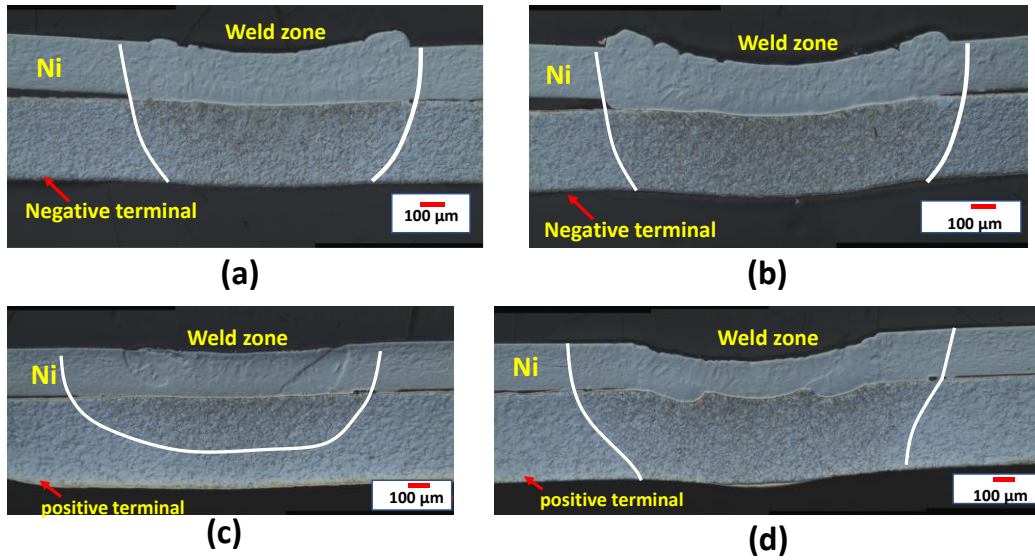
Cross-sectional view of weld nuggets of tab to live cell joint at (a) WC= 1800 A; WT= 8 ms and, P1 (b) WC= 2000 A; WT= 12 ms, P2 (c) WC= 1900 A; WT= 8 ms, P3 and (d) WC= 2100 A; WT= 12 ms, P4
